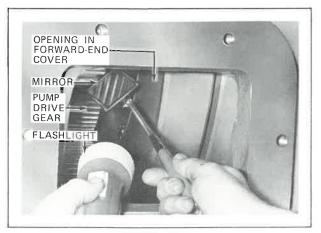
CHECKING PUMP DRIVE GEAR MATCH MARK NUMBERS.
